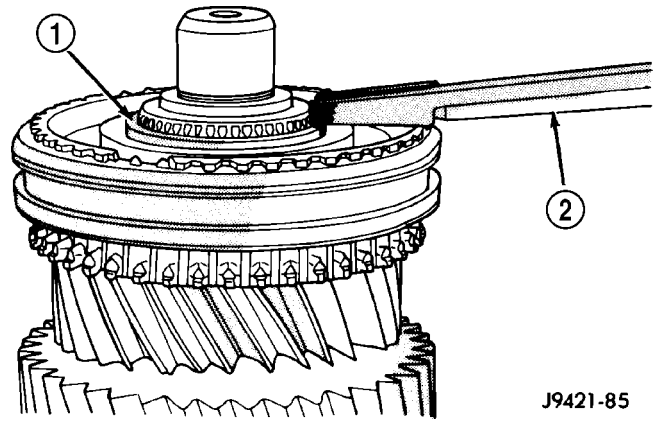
3-4 SYNCHRO ASSEMBLY ON SHAFT
